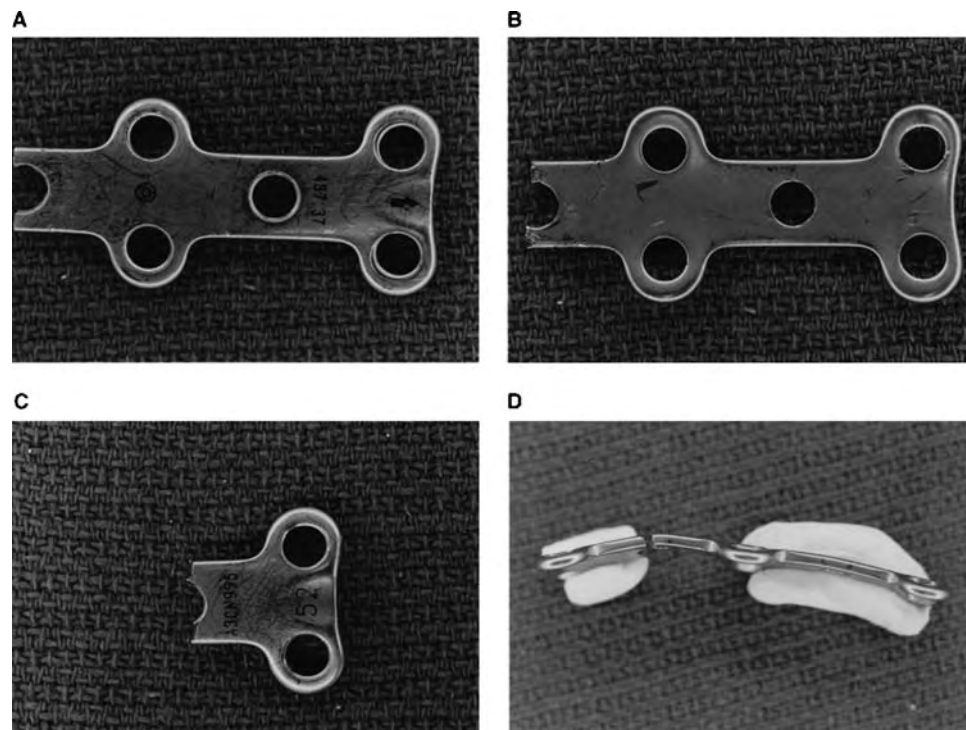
(A) Photograph of anterior cervical spine plate; (B) photograph of cephalad end anterior cervical spine plate showing wear near fracture surfaces; (C) photograph of caudal end anterior cervical spine plate showing wear near fracture surfaces; and (D) photograph of anterior cervical spine plate showing contour in plate.
